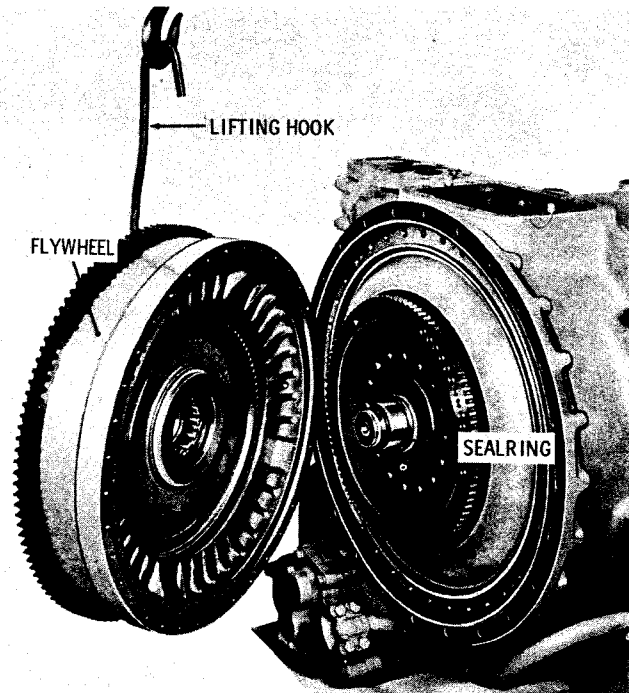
Installing flywheel assembly (direct mount, lockup models) S1563
